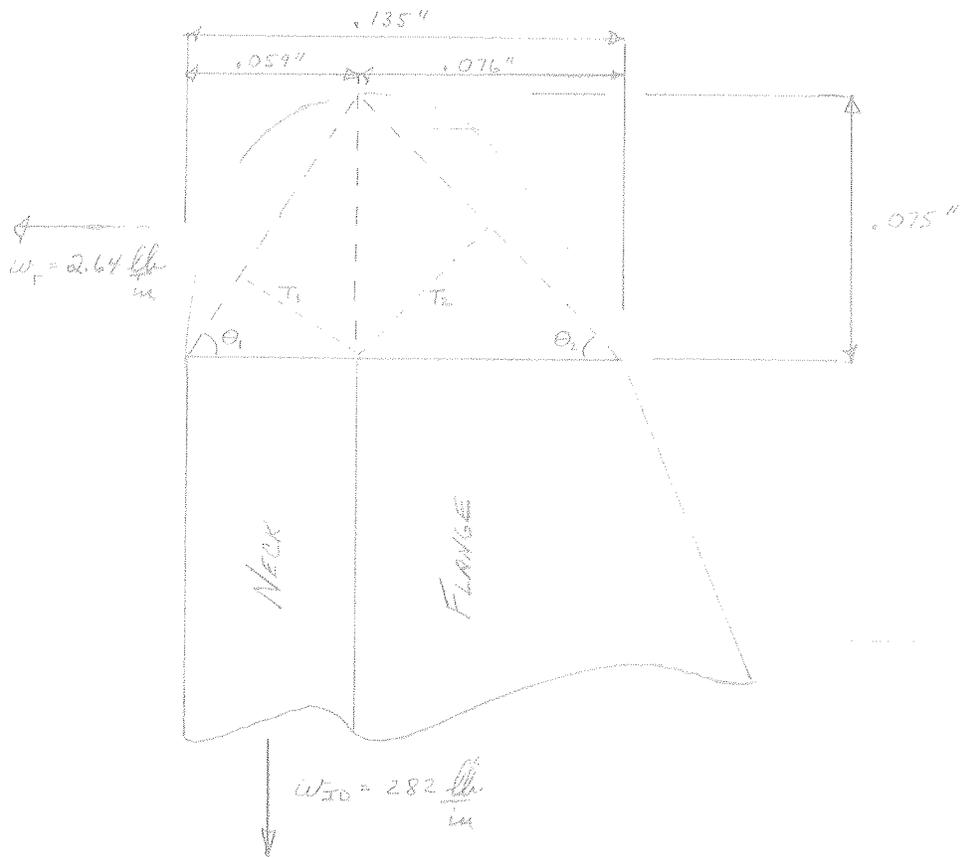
Dimensions and Forces on the Cryostat's Edge Weld
